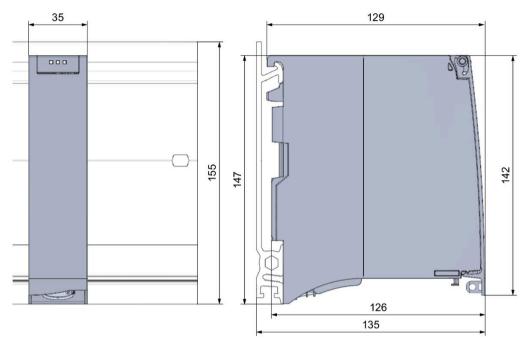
Dimensional drawing of the DI 64x24VDC SNK/SRC BA module
